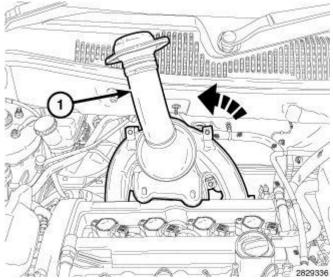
Rotating Maniverter Counterclockwise Courtesy of CHRYSLER GROUP, LLC
